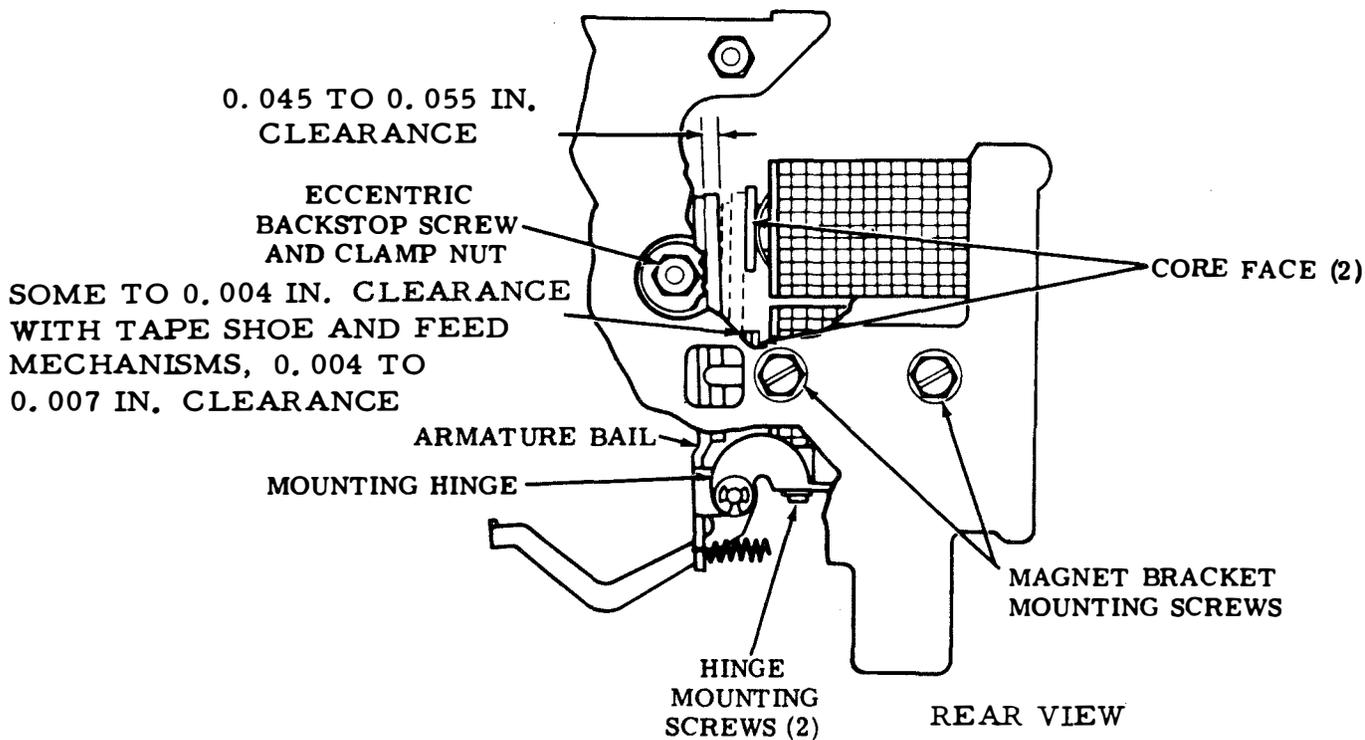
Clutch Magnet Assembly (Preliminary) (Core Clearance and Armature Bail Clearance)
